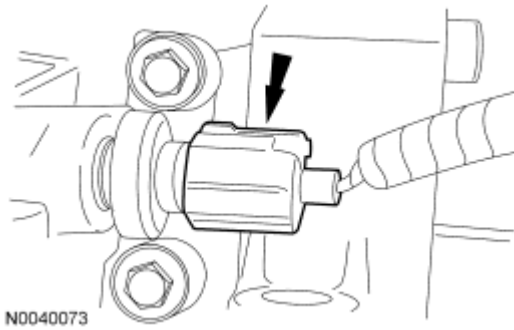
Locating Oil Pressure Sender Electrical Connector
